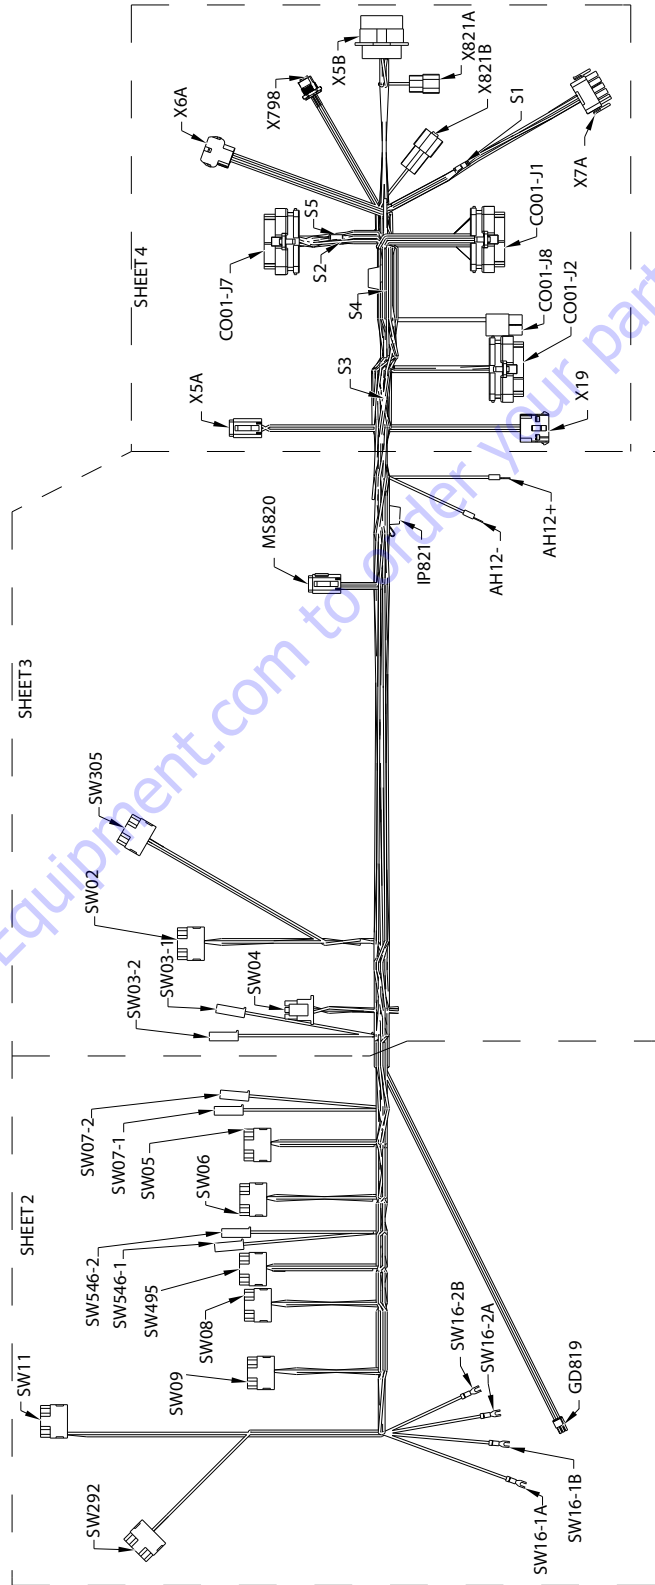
Platform Console Harness - Sheet 1 of 5
